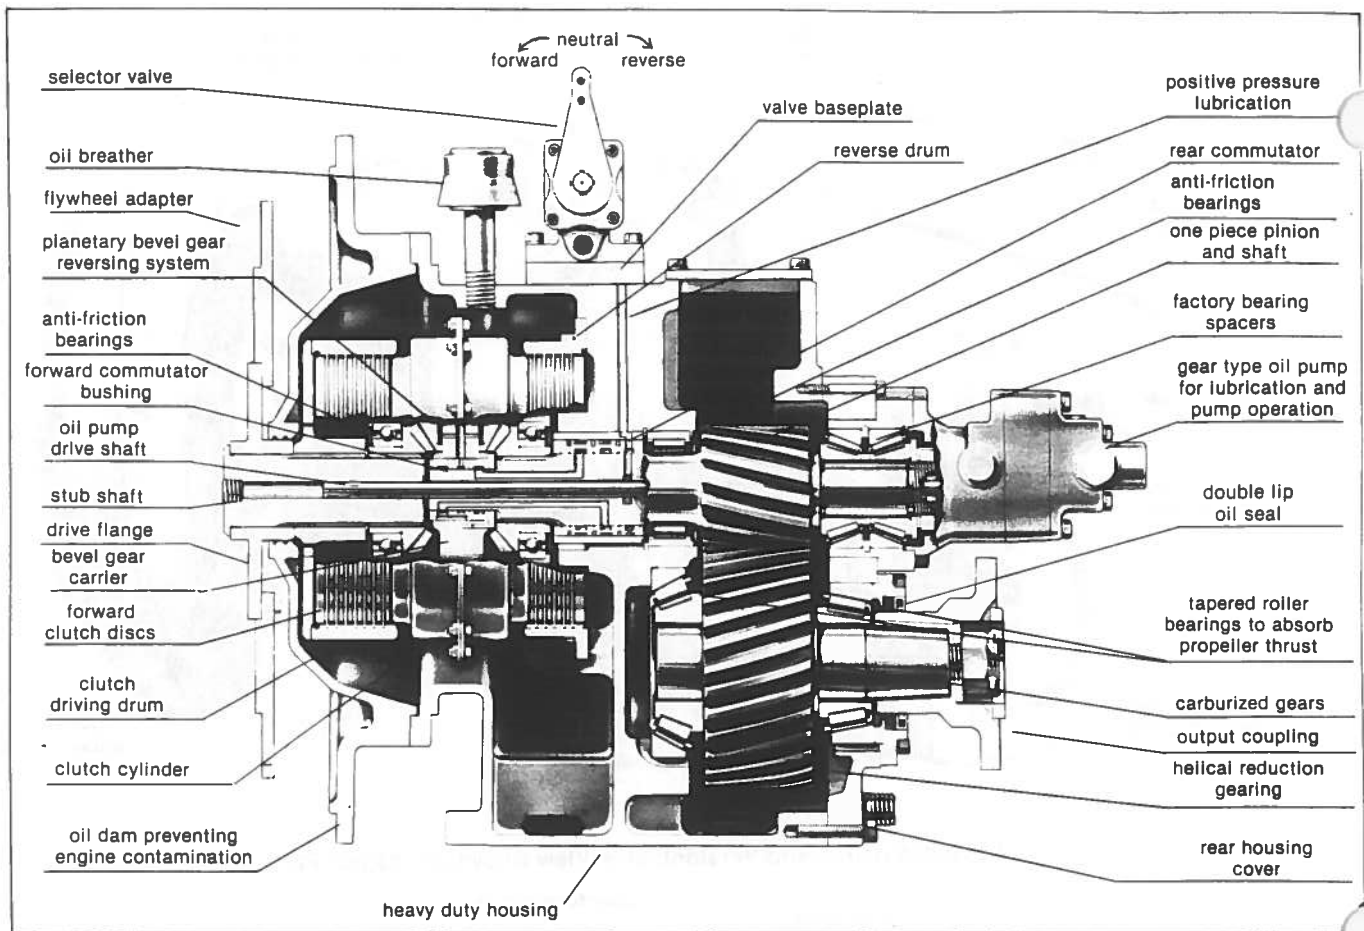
Cross Section Showing Components and Design Features (HE-10200 shown)
